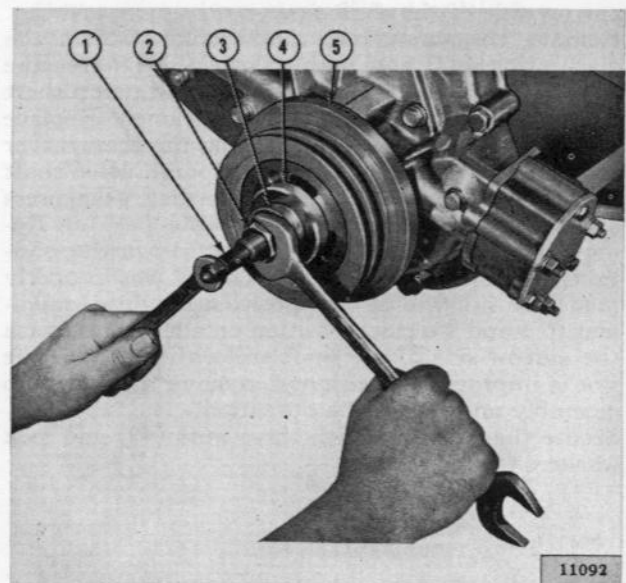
INSTALLING VIBRATION DAMPER WITH TOOL C-3732-A
